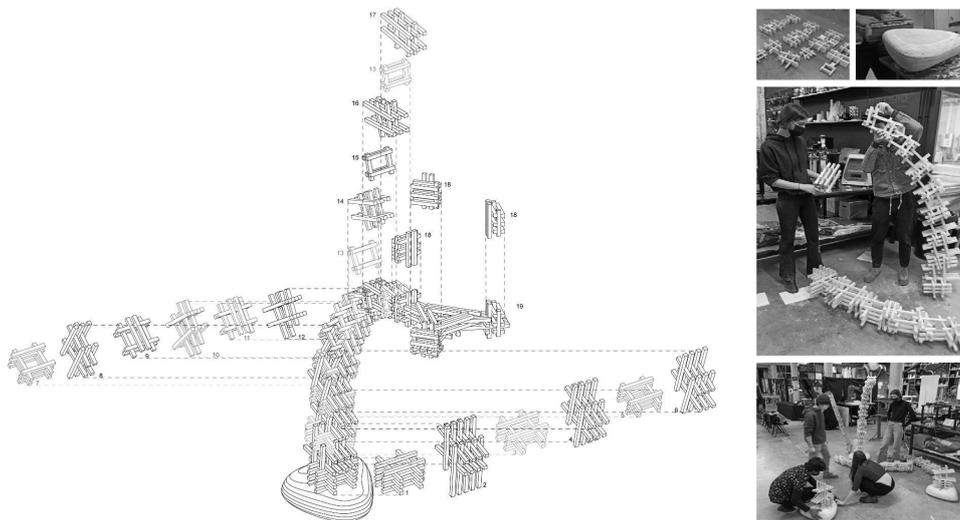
(a)Assembly steps: Components division of the catenary-arch of the funicular structure; (b)Pictures during the collective assembly process. All the components were placed, correctly labelled according to the guide drawings, once manufactured, on the building floor and then began the assembly process only once the robotic fabrication was finished
